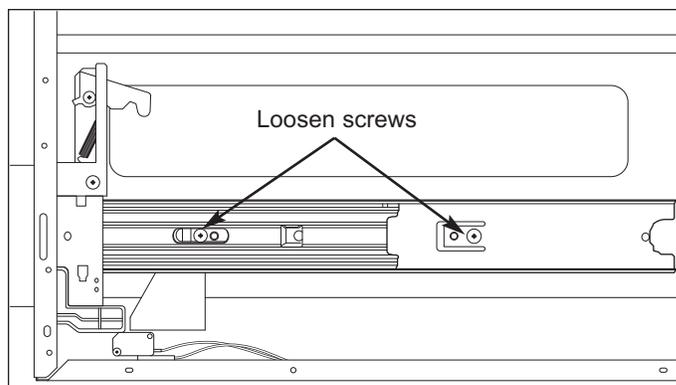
Switch Assembly Removal (Door Sensing Switch Shown)
